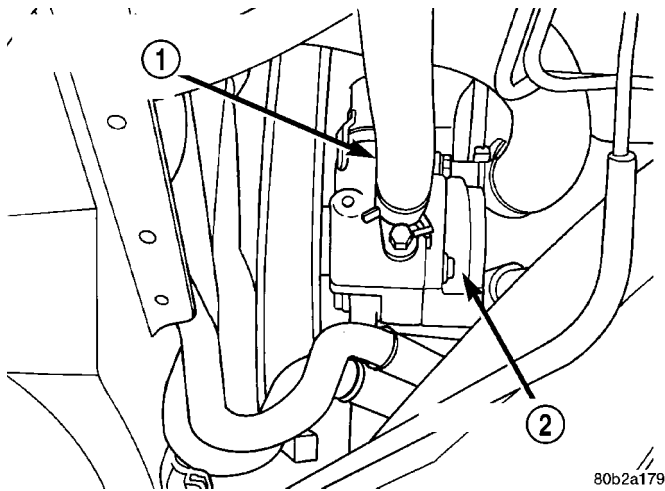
Power Steering Fluid Supply Hose At Power Steering Pump
